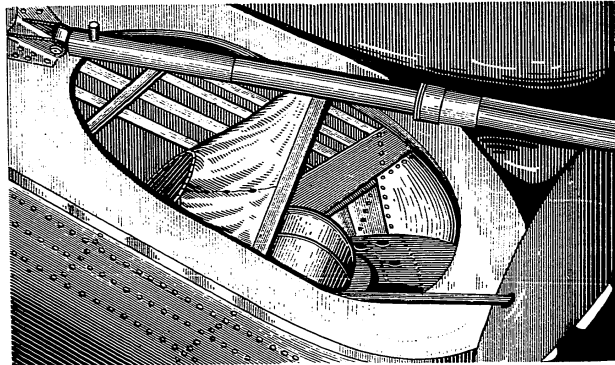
HATCH GIVING ACCESS TO INTERMEDIATE GEAR BOX (with lower fairing removed).
